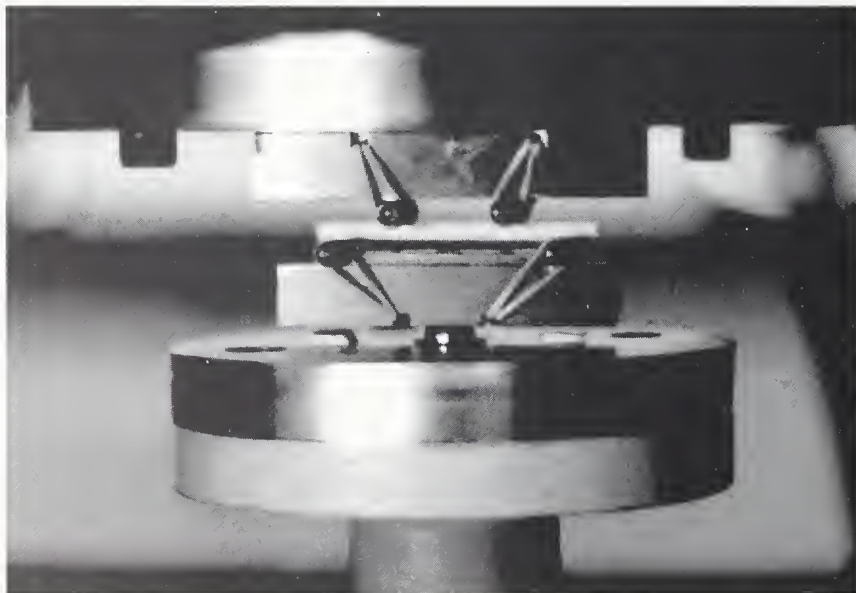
Flexural testing is the most common method to evaluate ceramic strength. A simple beam specimen (white in the photo) is loaded in a four-point bend fixture until fracture occurs. The standardization of the specimen size and preparation, and the fixture size and type, has led to dramatic improvement in data quality and major cost savings.
